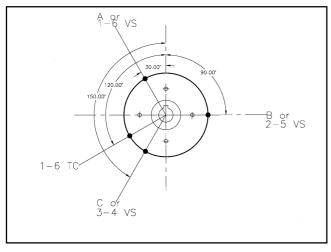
Accessory drive pulley marking-N-855/N-743
